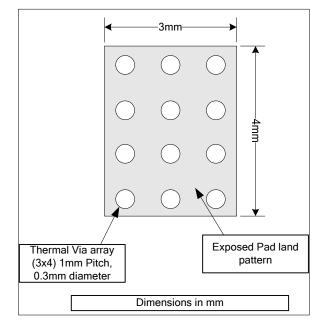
Recommended PCB layout for Thermal Pad Array Footprint (PS)
